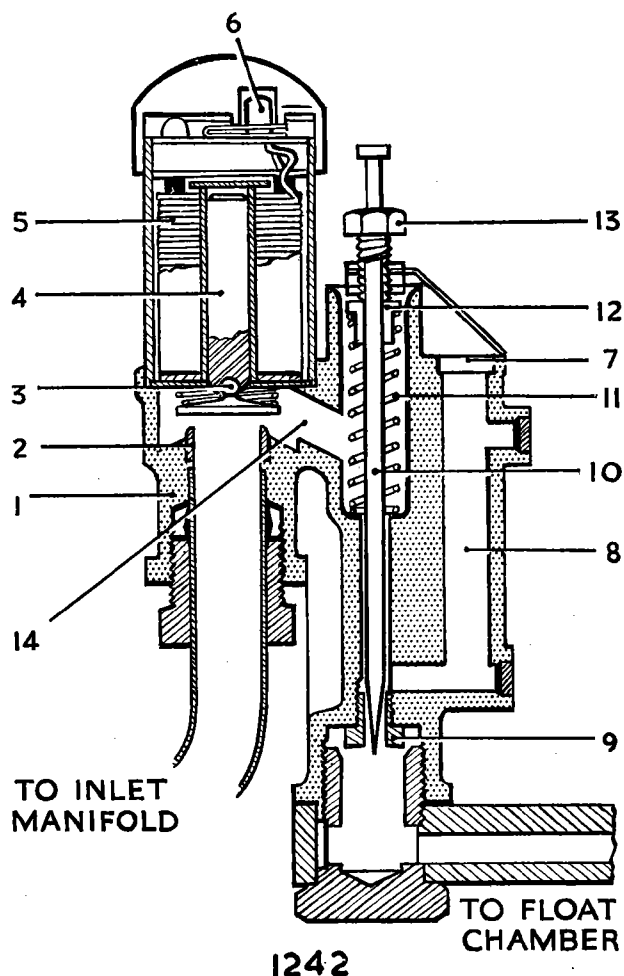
Sectioned view of the auxiliary starting carburetter.
